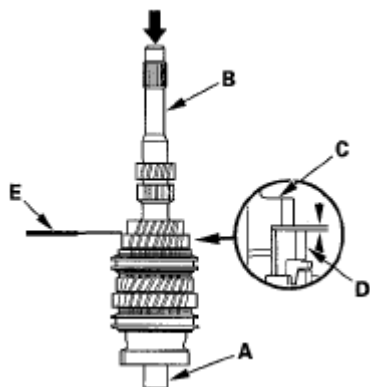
Measuring Clearance Between 2nd Gear And 3rd Gear With Feeler Gauge
